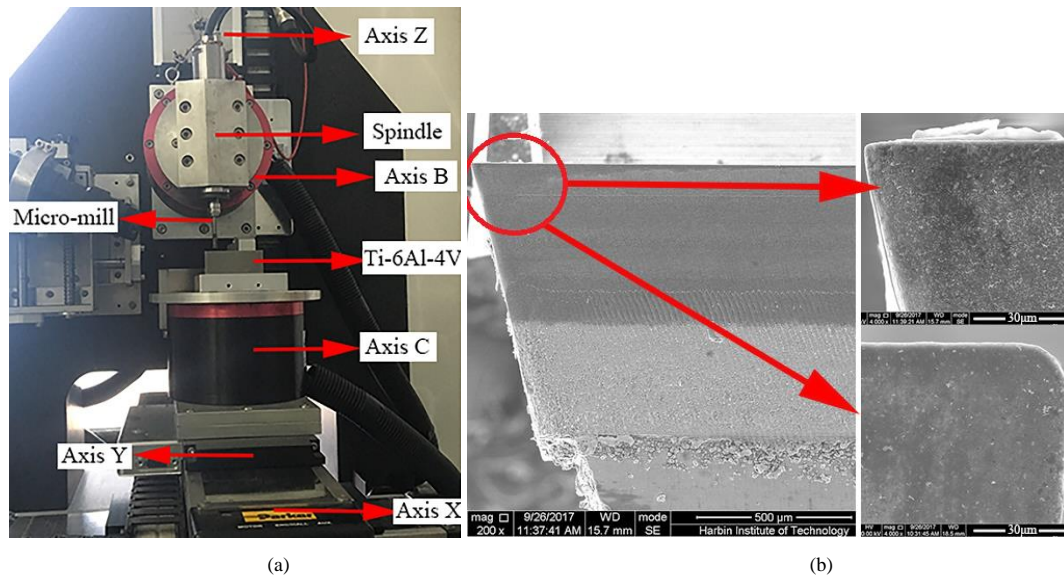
Experimental setup (a) miniature milling machine; (b) the main and top views of brand PCD tool.
